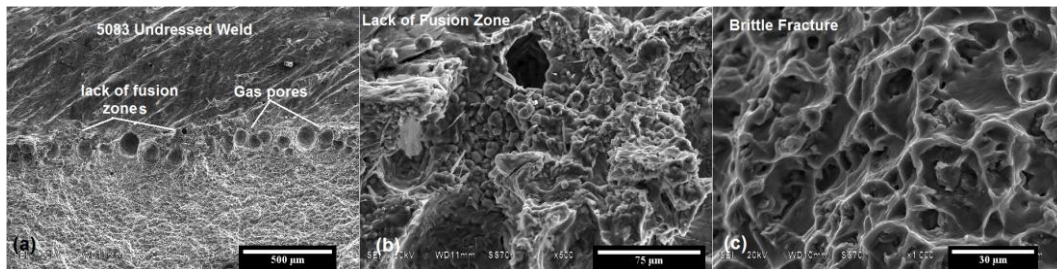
Typical tensile fracture surfaces of undressed 5083 welds failing at the weld/HAZ transition zone: (a) lack-of-fusion type defects and gas pores at the 5083 weld/HAZ interface, (b) lack-of-fusion defects; and (c) ductile mixed-mode failure in 5083 at the weld/HAZ interface.
